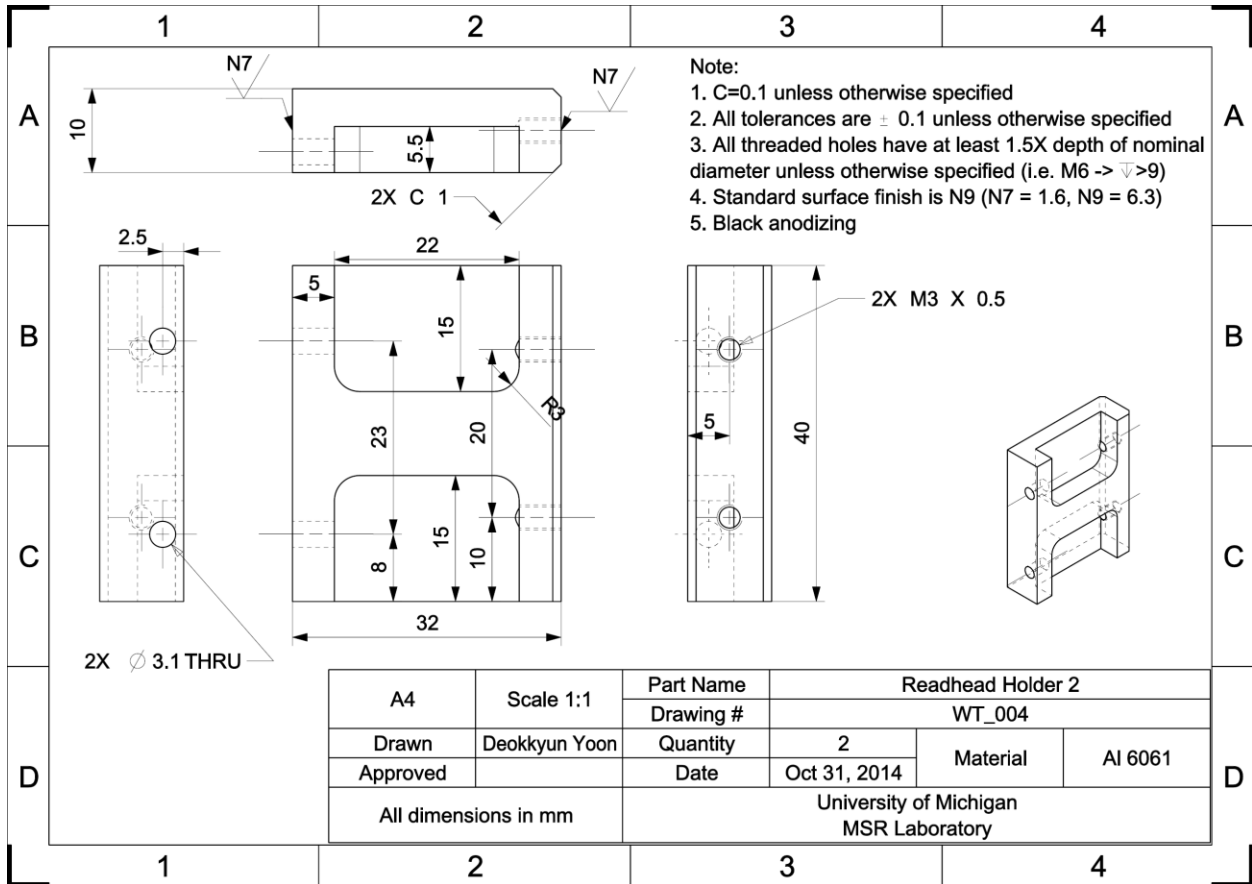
Manufacturing drawing of Readhead Holder #2.
